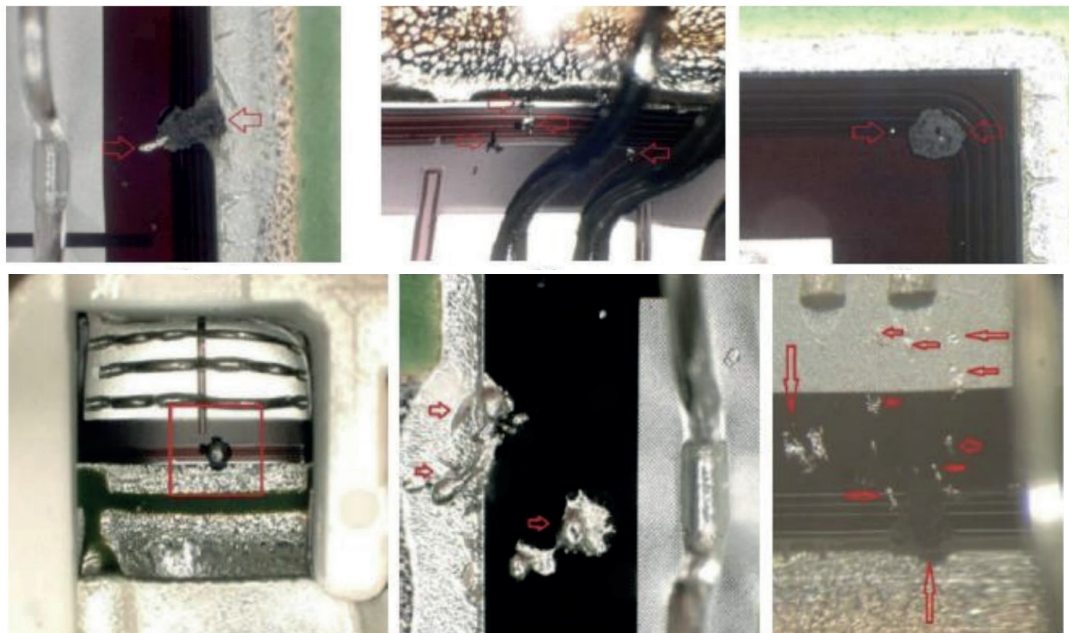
Typical examples of soldering splashes in inspected images
